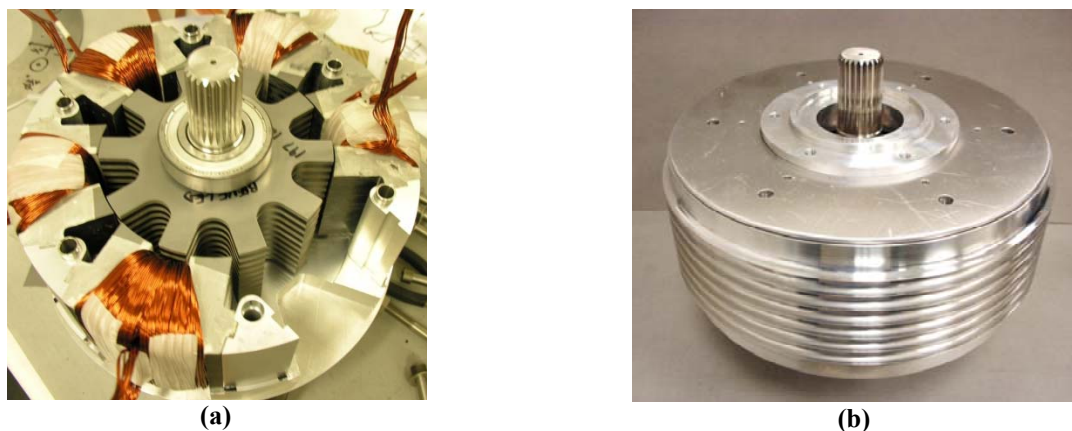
IMFP SRM final assembly: (a) winding installation and (b) finished IMFP SRM.
